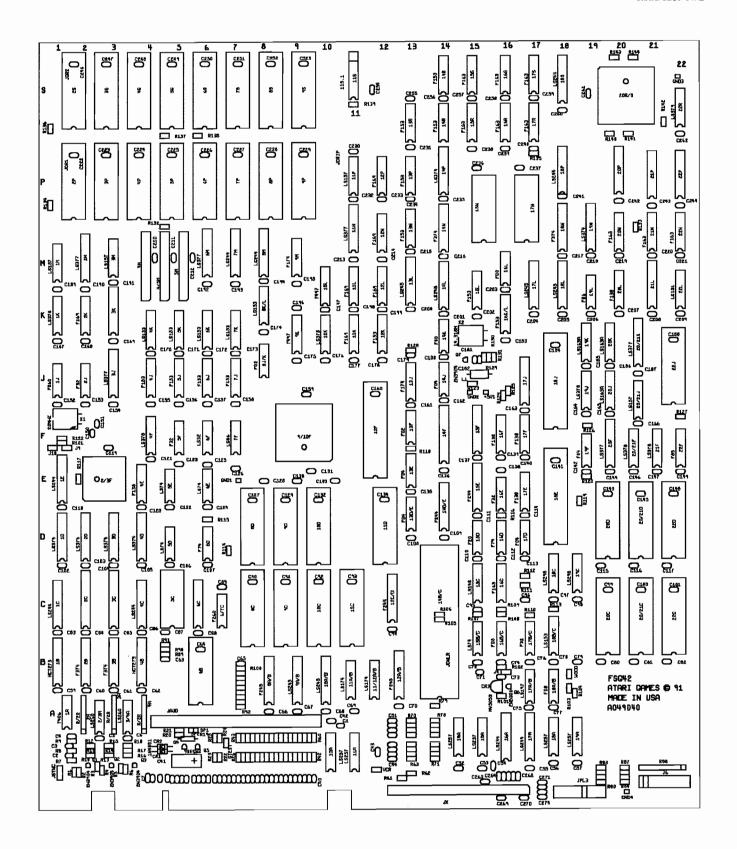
Road Riot 4WD Game PCB Assembly A049040-01 D
